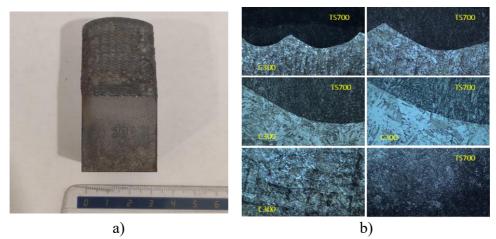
Hybrid SLM-LMD coupon manufacturing a) and dissimilar material interface b)
